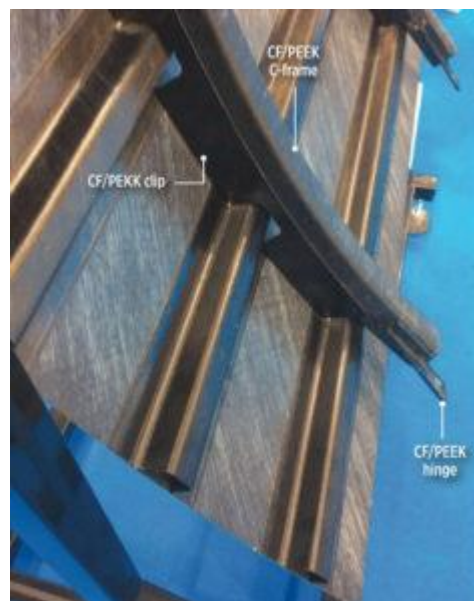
Ultrasonic spot welding used to join CFRP frames in an aircraft structure
